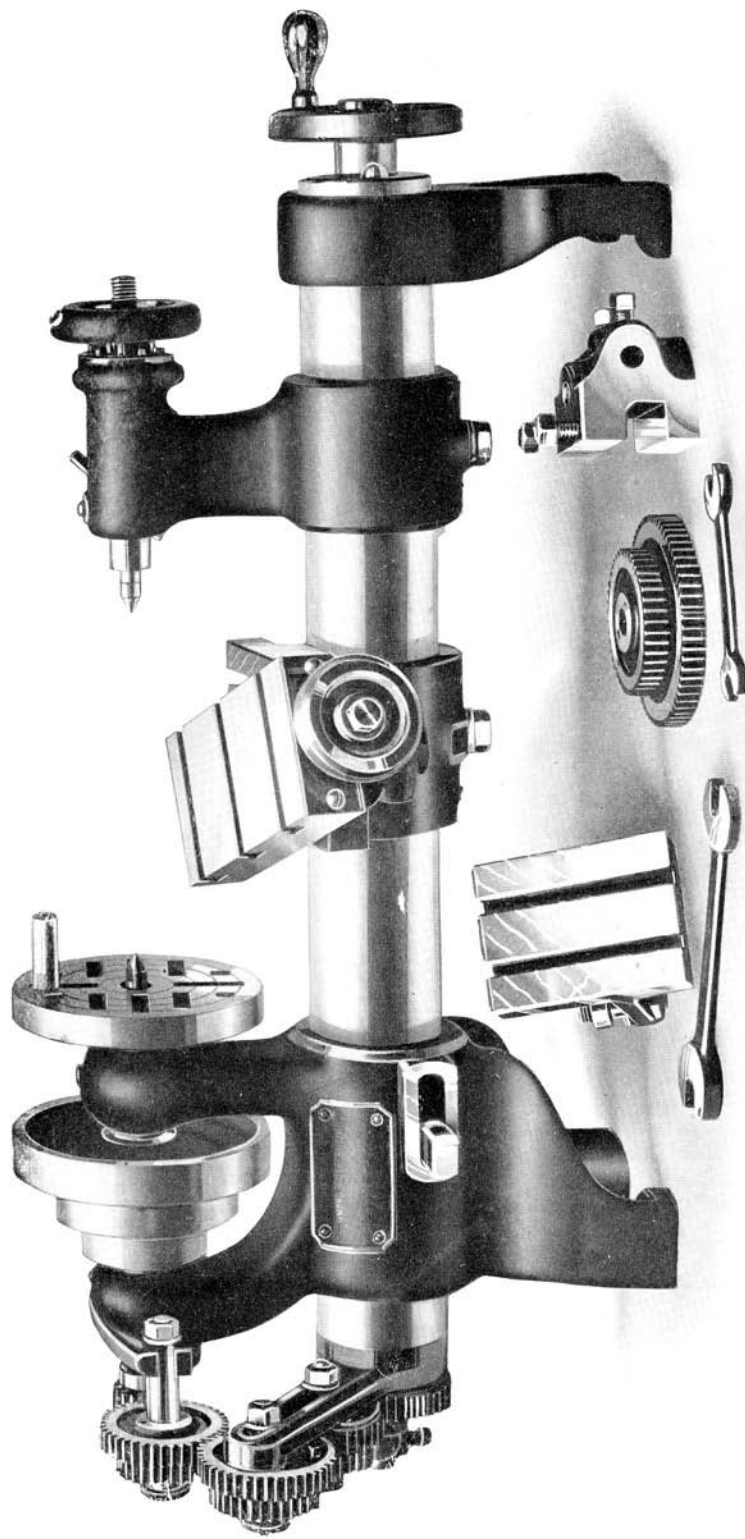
'A' Type New Model Makers' Self-Acting, Sliding, Boring, Screw Cutting and Milling Lathe.
